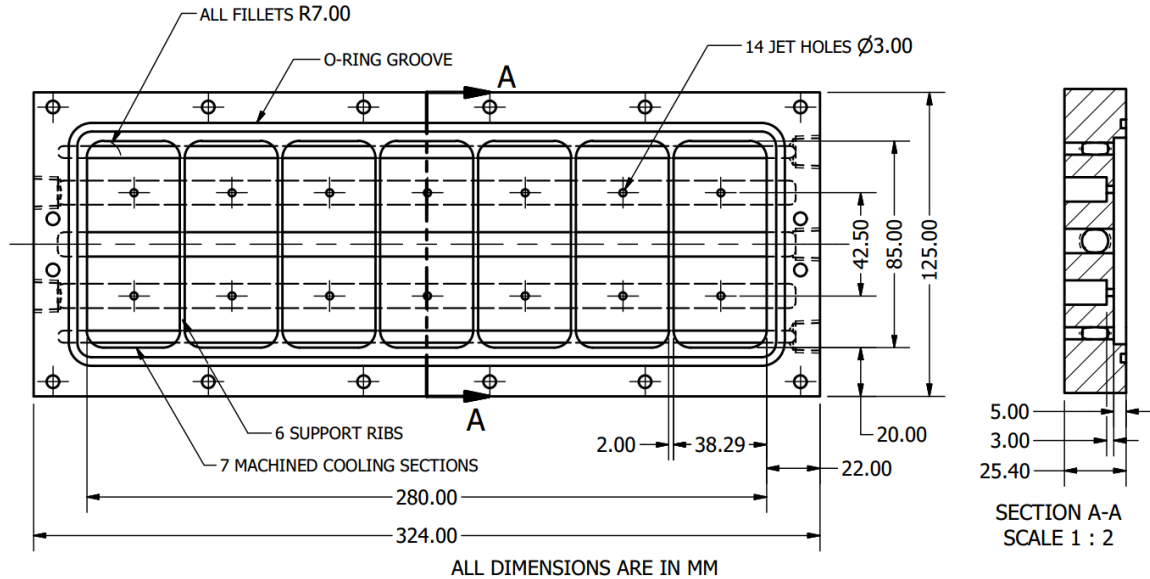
A CAD drawing showing the design features on the top surface of the heat exchanger body.
